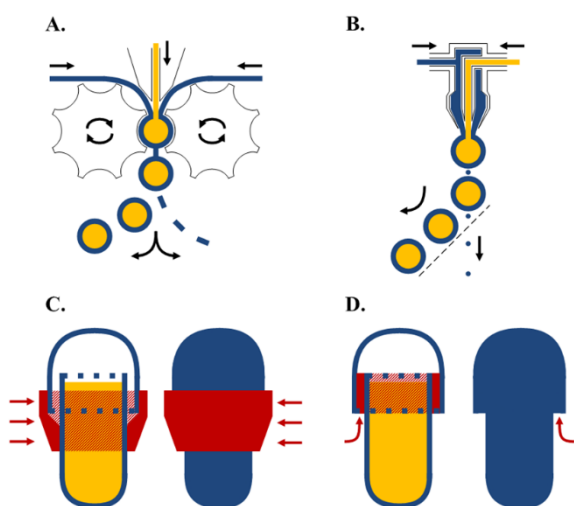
Schematics of the rotary die method (a) and bubble method (b) for liquid capsule filling process, and of the capsule sealing techniques using banding (c) and LEMS™ (d).
